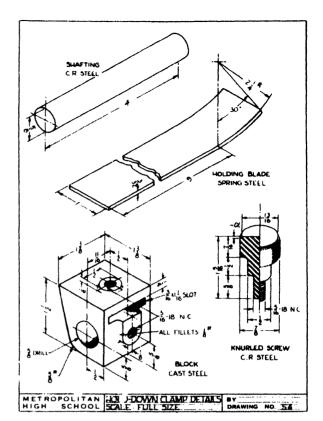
HOLD-DOWN CLAMP DETAILS (PROBLEM)
